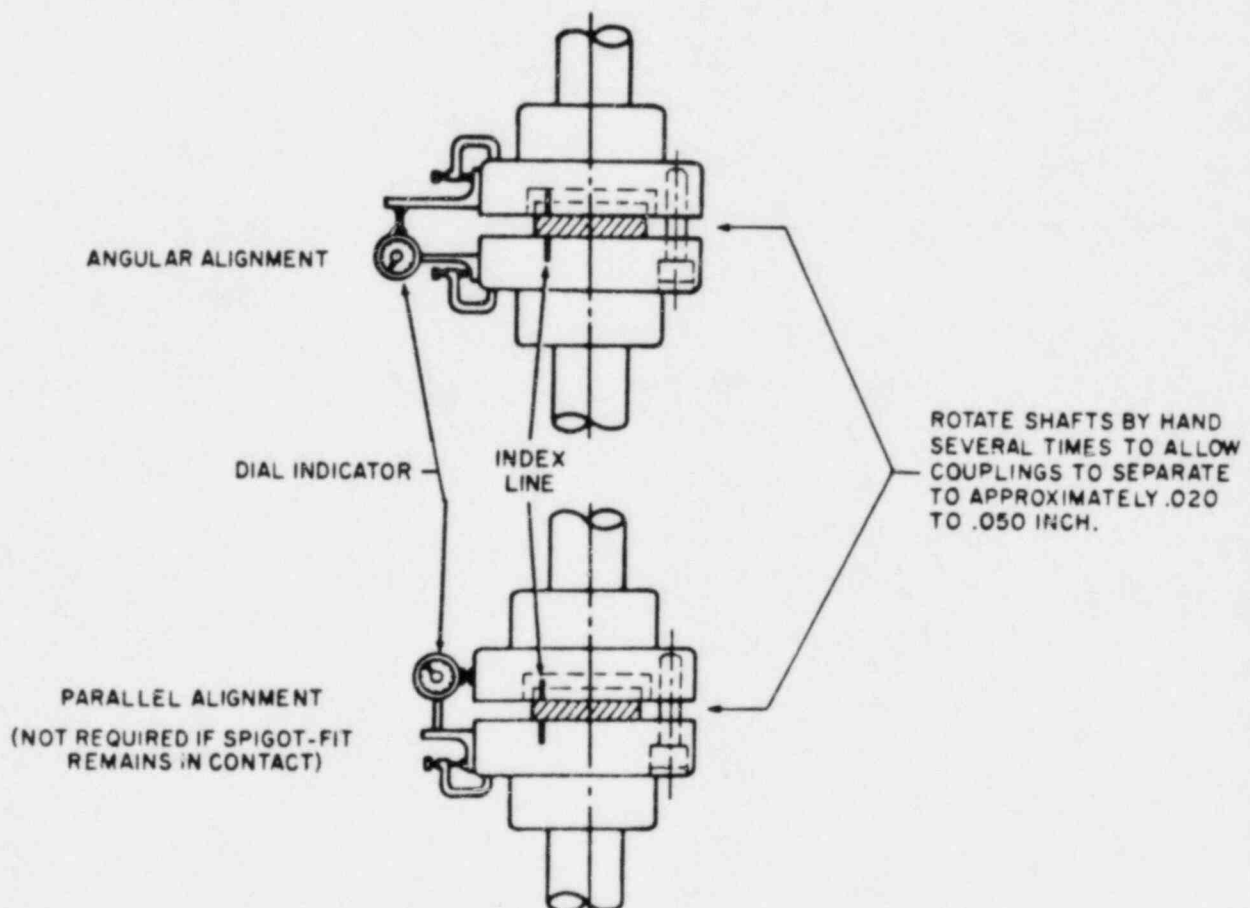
TEST ALIGNMENT WITH DIAL INDICATOR (SOLID COUPLING)
